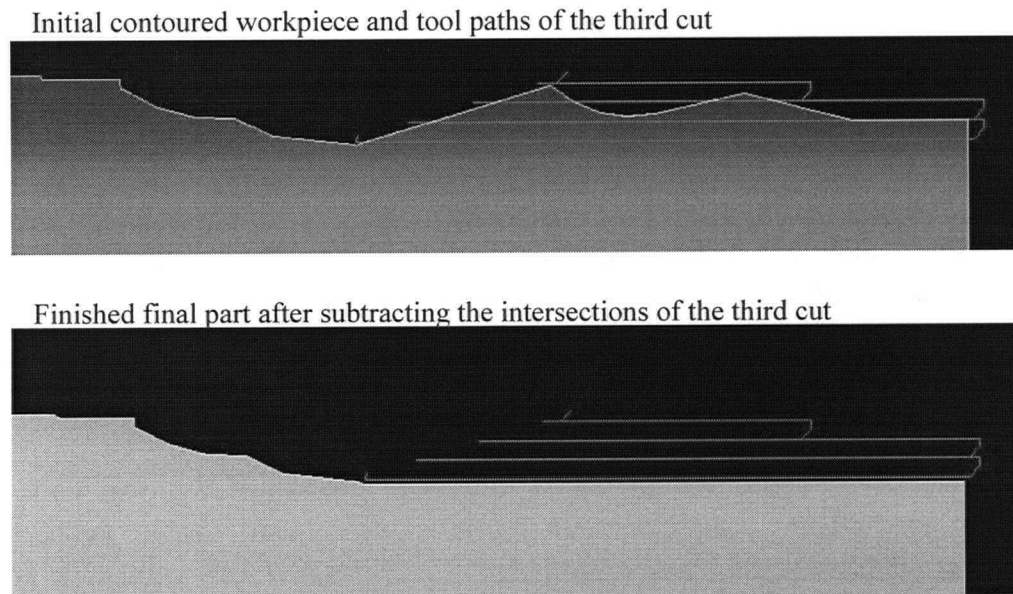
Tool Paths and Workpiece of the Third Cut
